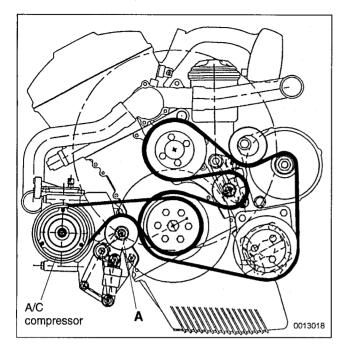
6-cylinder engine belt diagram: To remove A/C belt, lever tensioner (A) in clockwise direction using long-handled wrench or breaker-bar.
